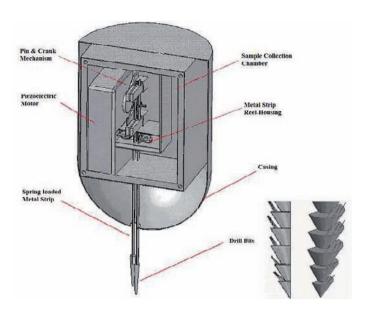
Engineering prototype: micro-drill (left); drill bits (right)
